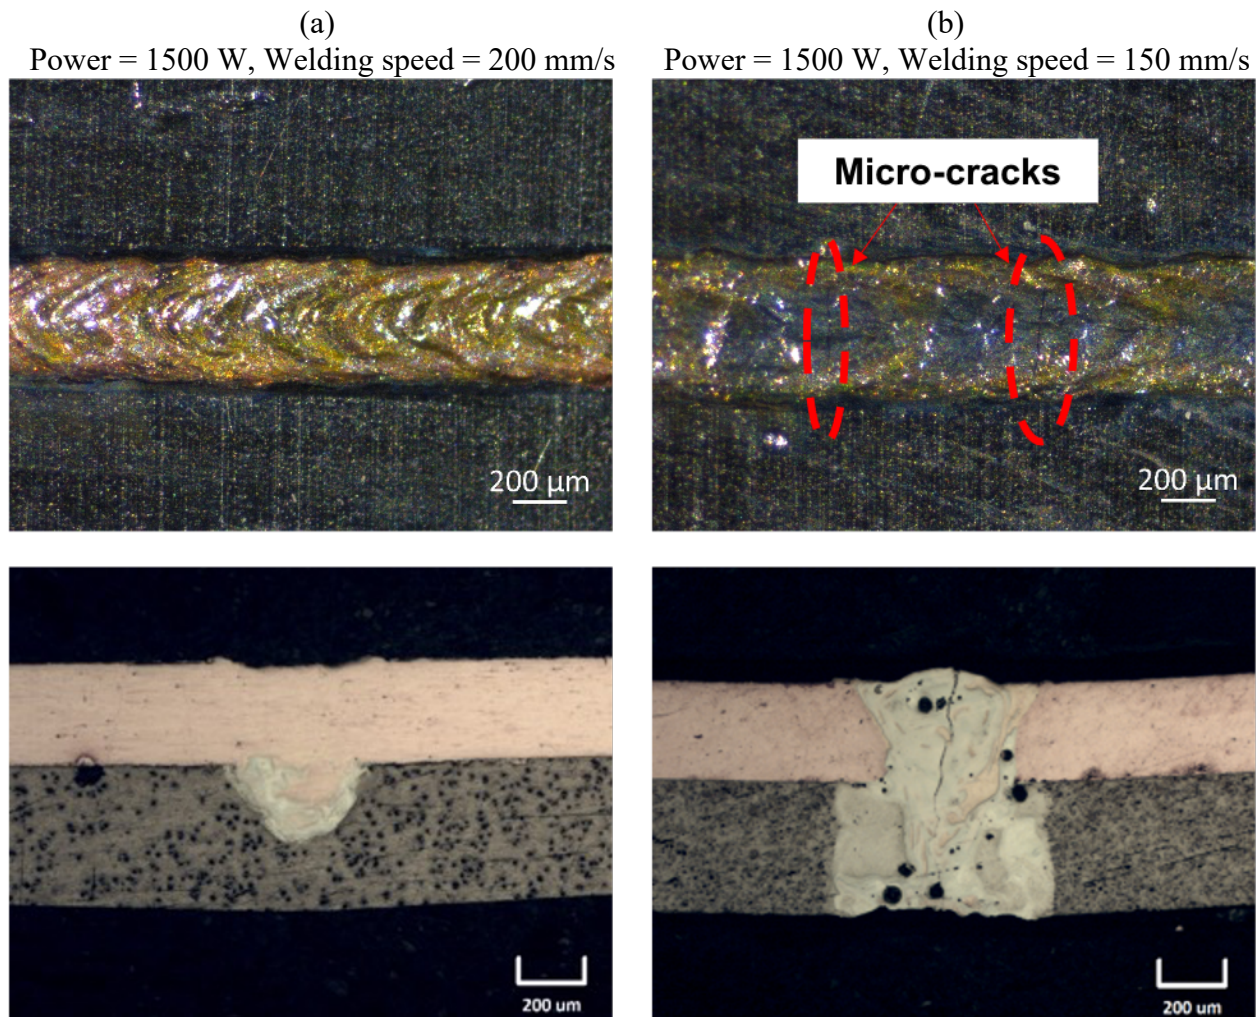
Top and cross sections of the welded sample with 420 mm lens[78].
